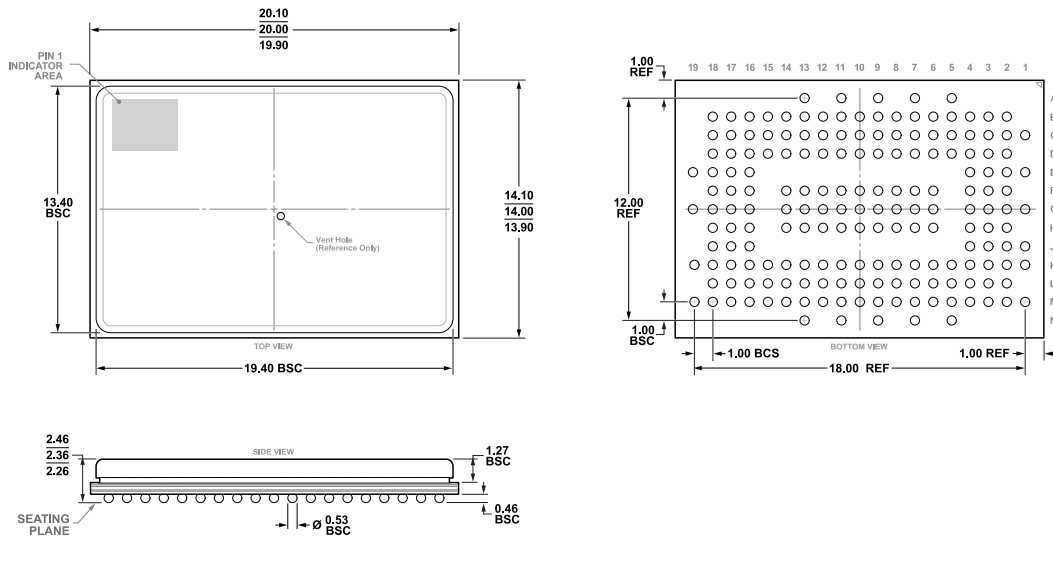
179-Ball Premolded Cavity Ball Grid Array [BGA_CAV] (BV-179-1)
